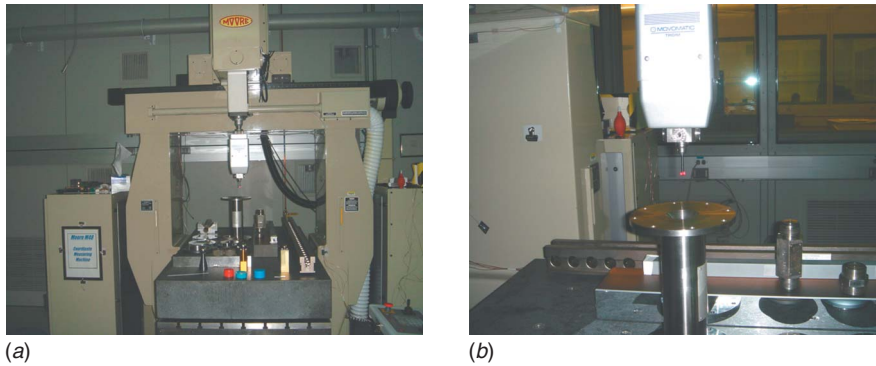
Moore M48 CMM (the left picture shows a full view of CMM while the right one shows a close-up of probe and CFV just prior to dimensional calibration)
